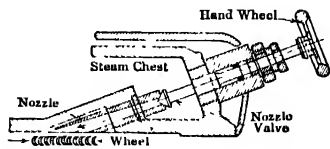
Nozzle Arrangement, De Laval "Class A" Turbine.
